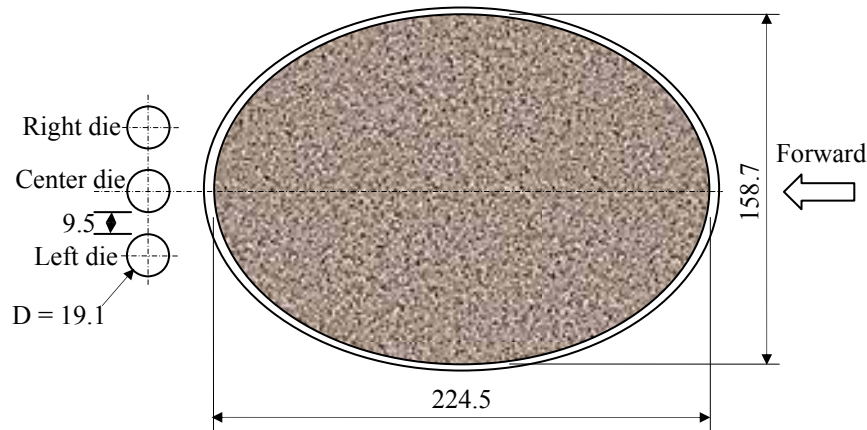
Dimensions of the cylindrical dies and the feed shoe cross-section in contact with the table surface (drawn to scale) (unit: mm)
